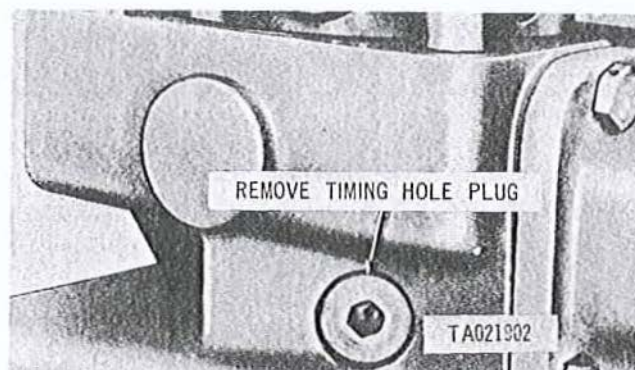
Removing or installing fuel injection pump timing hole plug.
